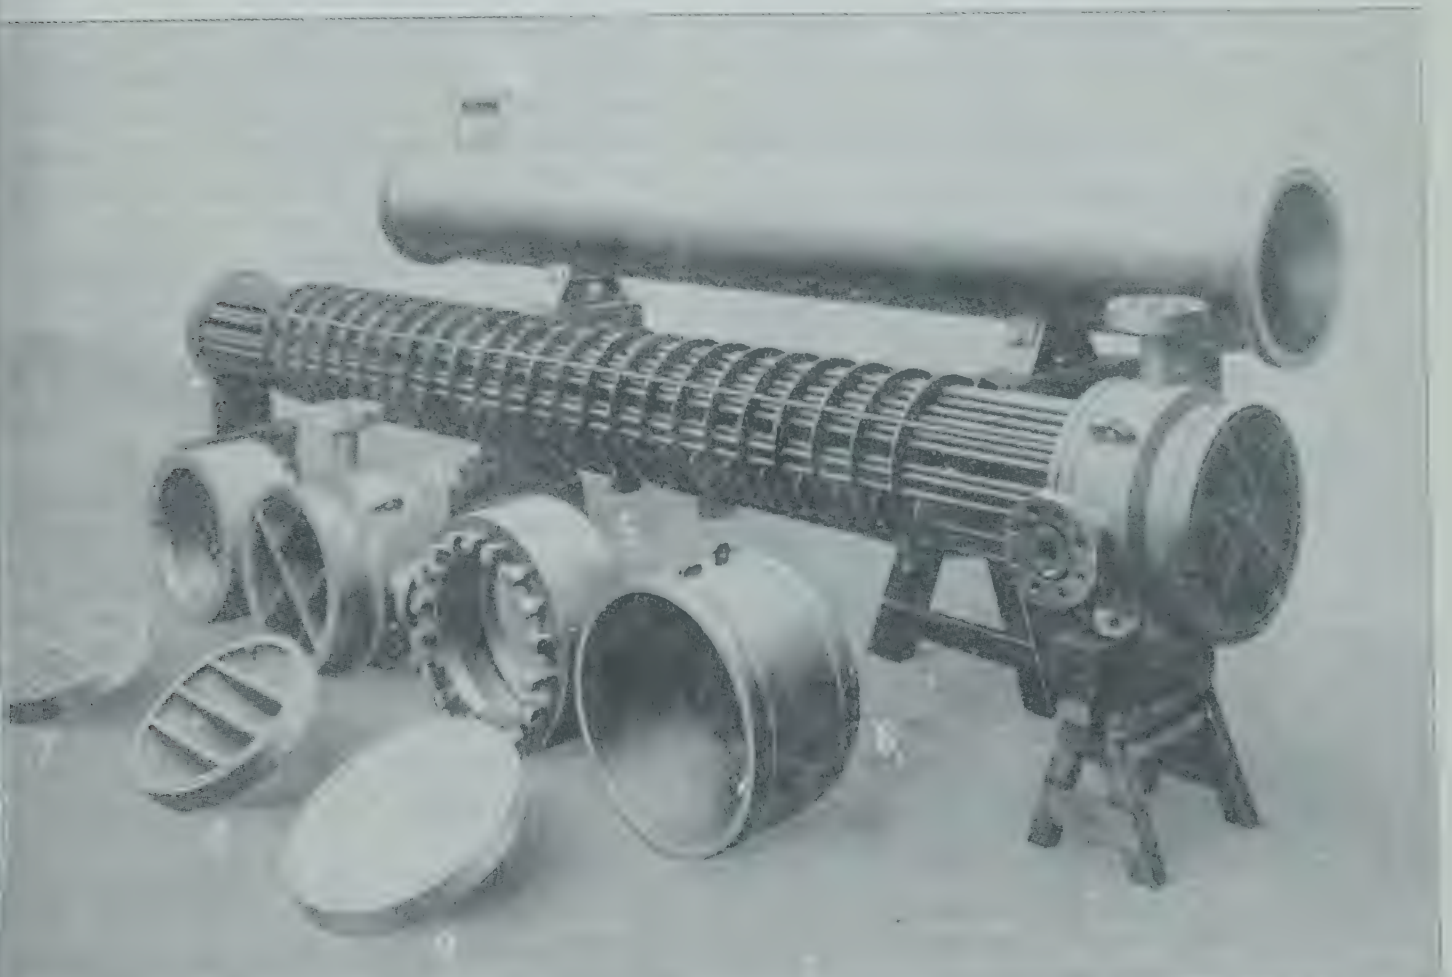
Component parts of a feed water heater. (American Locomotive Co.) 1, shell; 2, assembled tube bundle; 3, clamp ring for floating head; 4, channel with integral tube sheet; 5, clamp ring for channel cover; 6, shell cover; 7, floating head tube sheet; 8, floating head cover; 9, channel cover.
